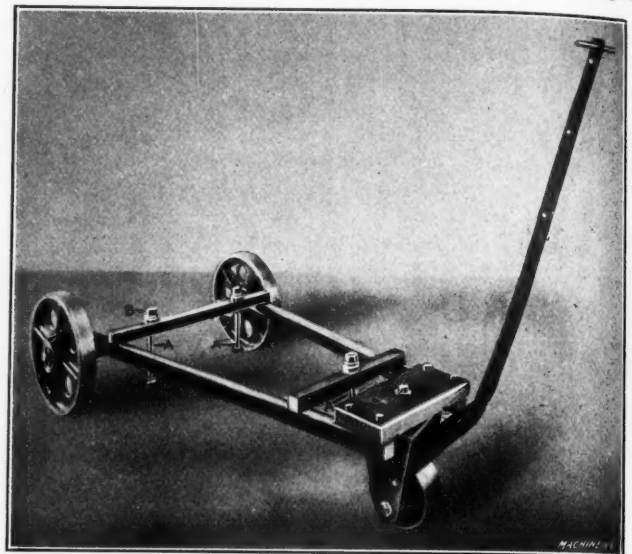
Roller-bearing Truck designed by the Fosdick Machine Tool Co. for handling Heavy Machine Tools
